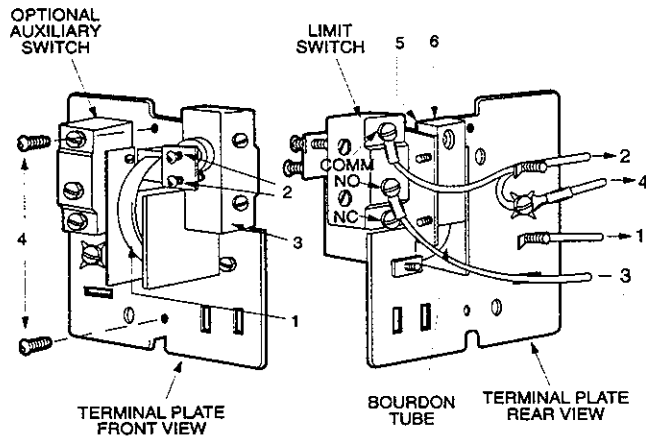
H11 Terminal Plate with Limit and Auxiliary Switches
